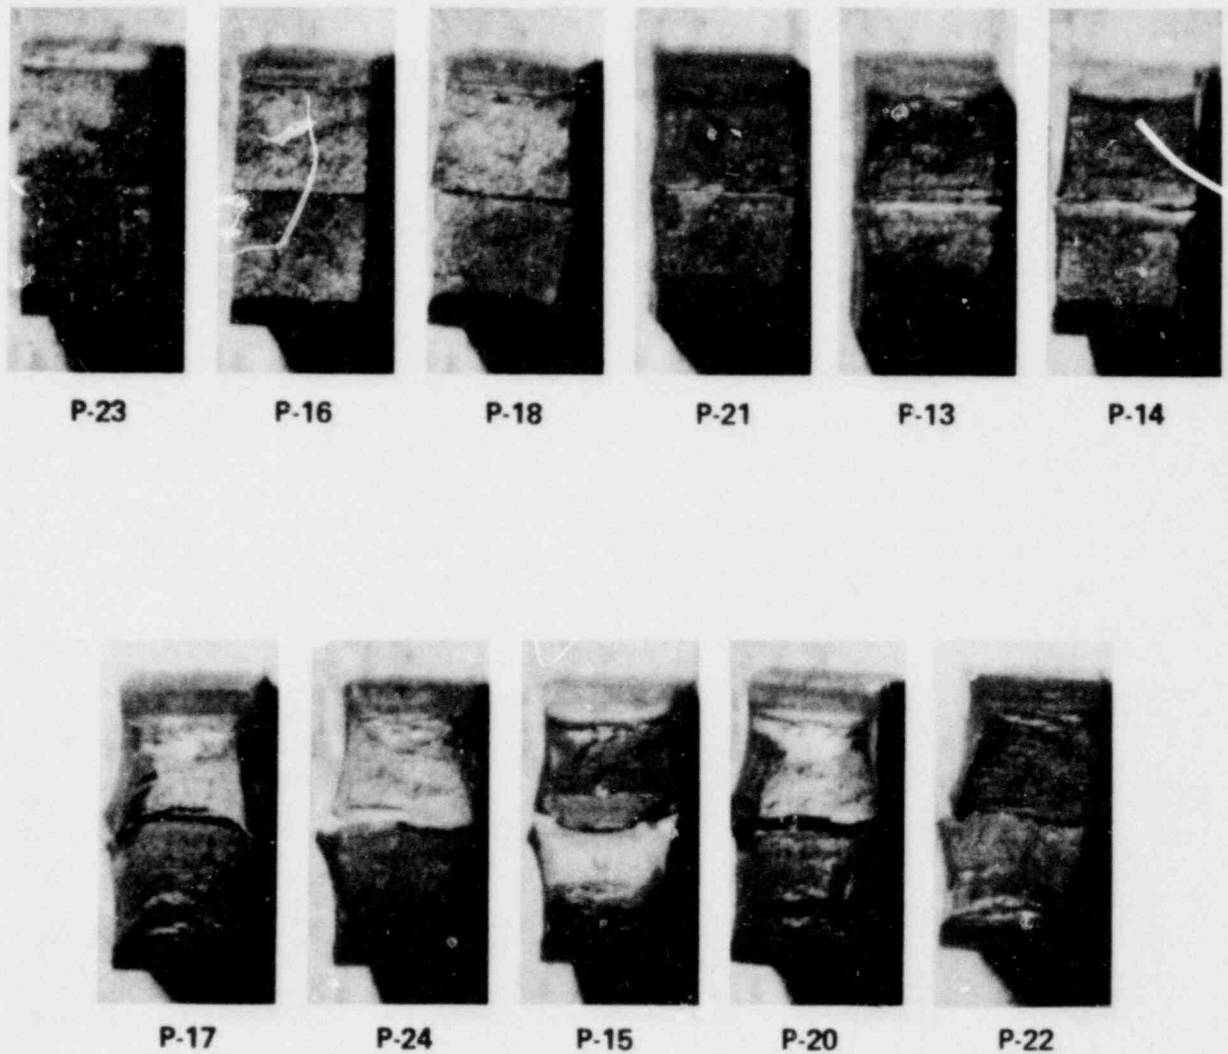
Charpy Impact Specimen Fracture Surfaces for Kewaunee Intermediate Shell Forging 122x208 VA1
